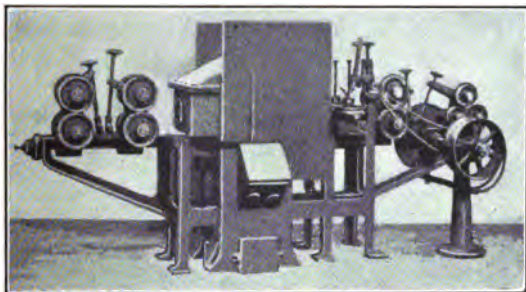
Pipe welding machine equipped with coke preheater.
